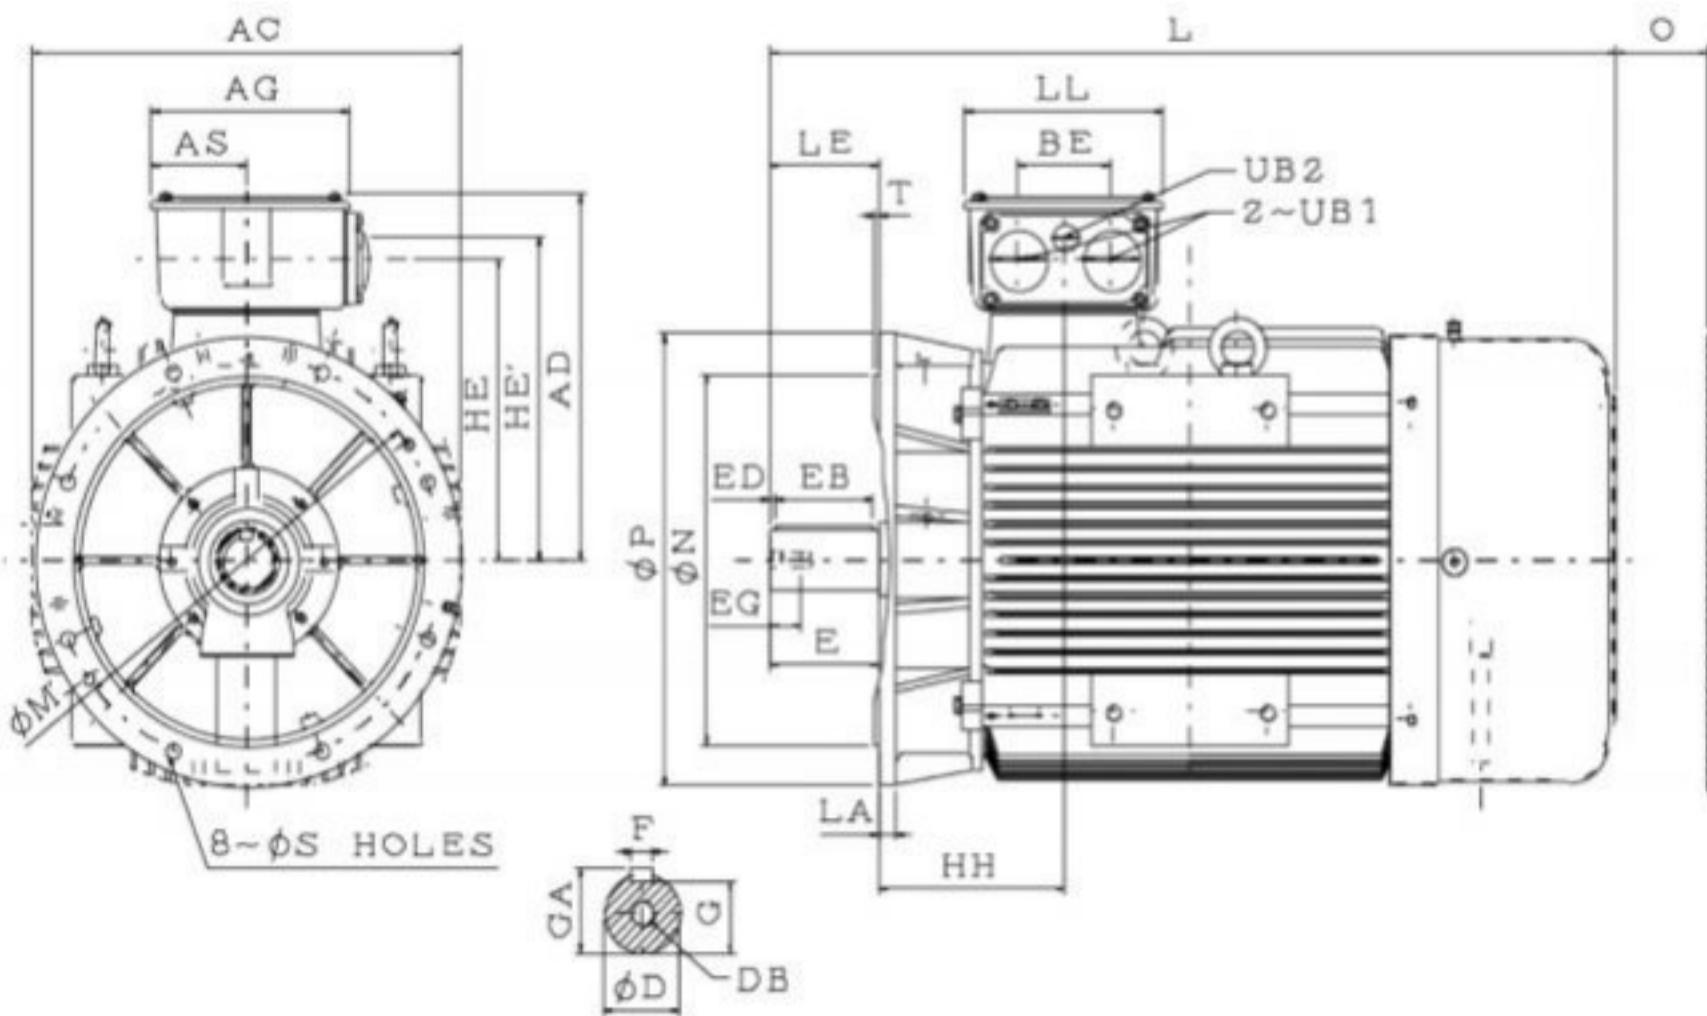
Outline drawing of cast iron design, flange version, mounting B5, frame size 280
